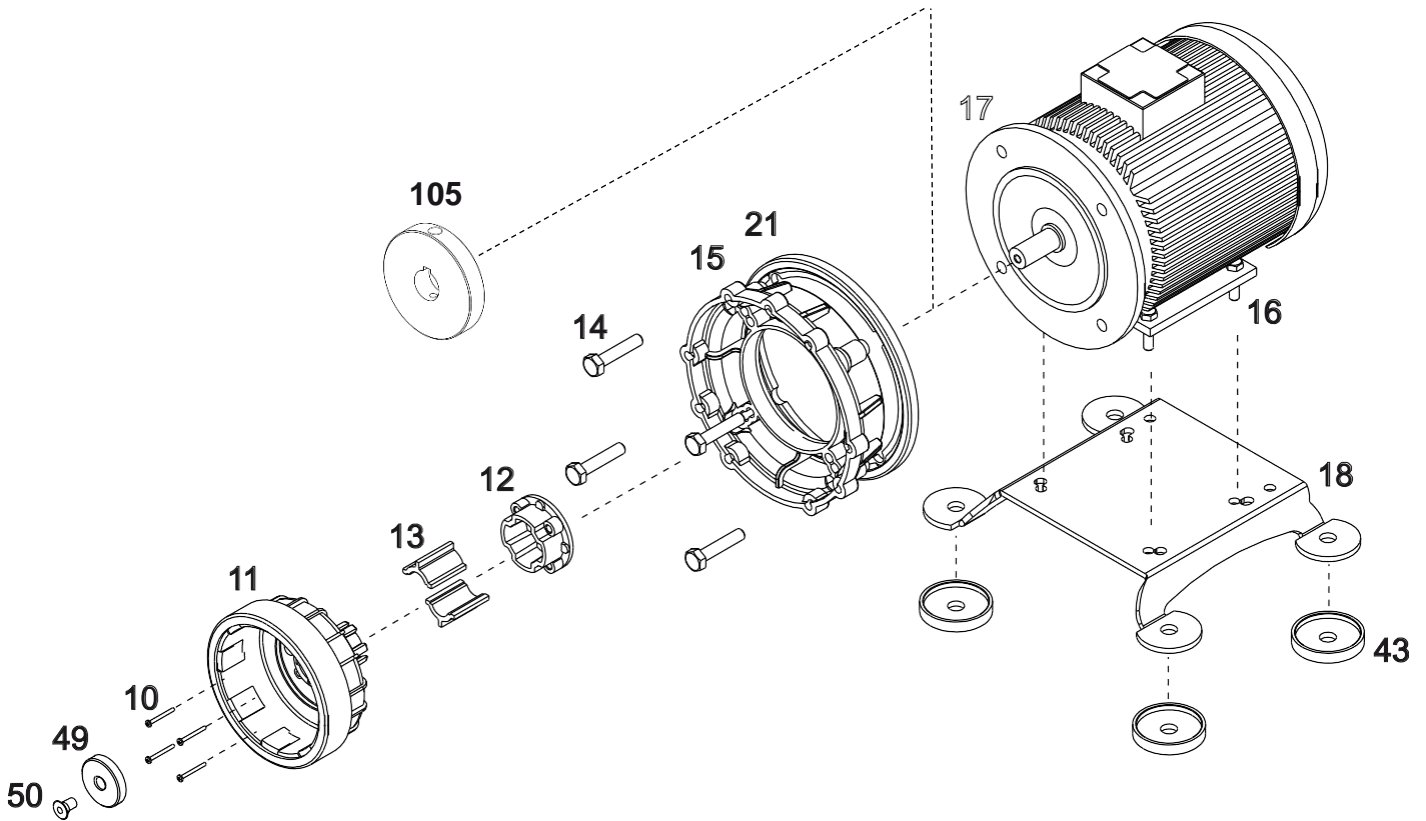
A – disassembling sequence MOTOR PARTS
